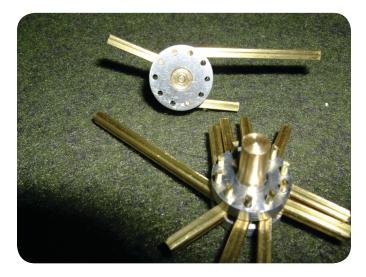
The jig used to drill the bearing hole for the inside portion of the cam rods.
